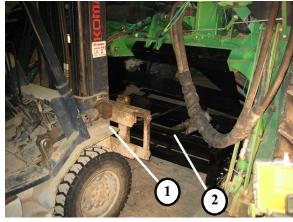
Positioning Front Belt Frame Key 1 – Fork Lift (lifting device) Key 2 – Front Belt Frame
